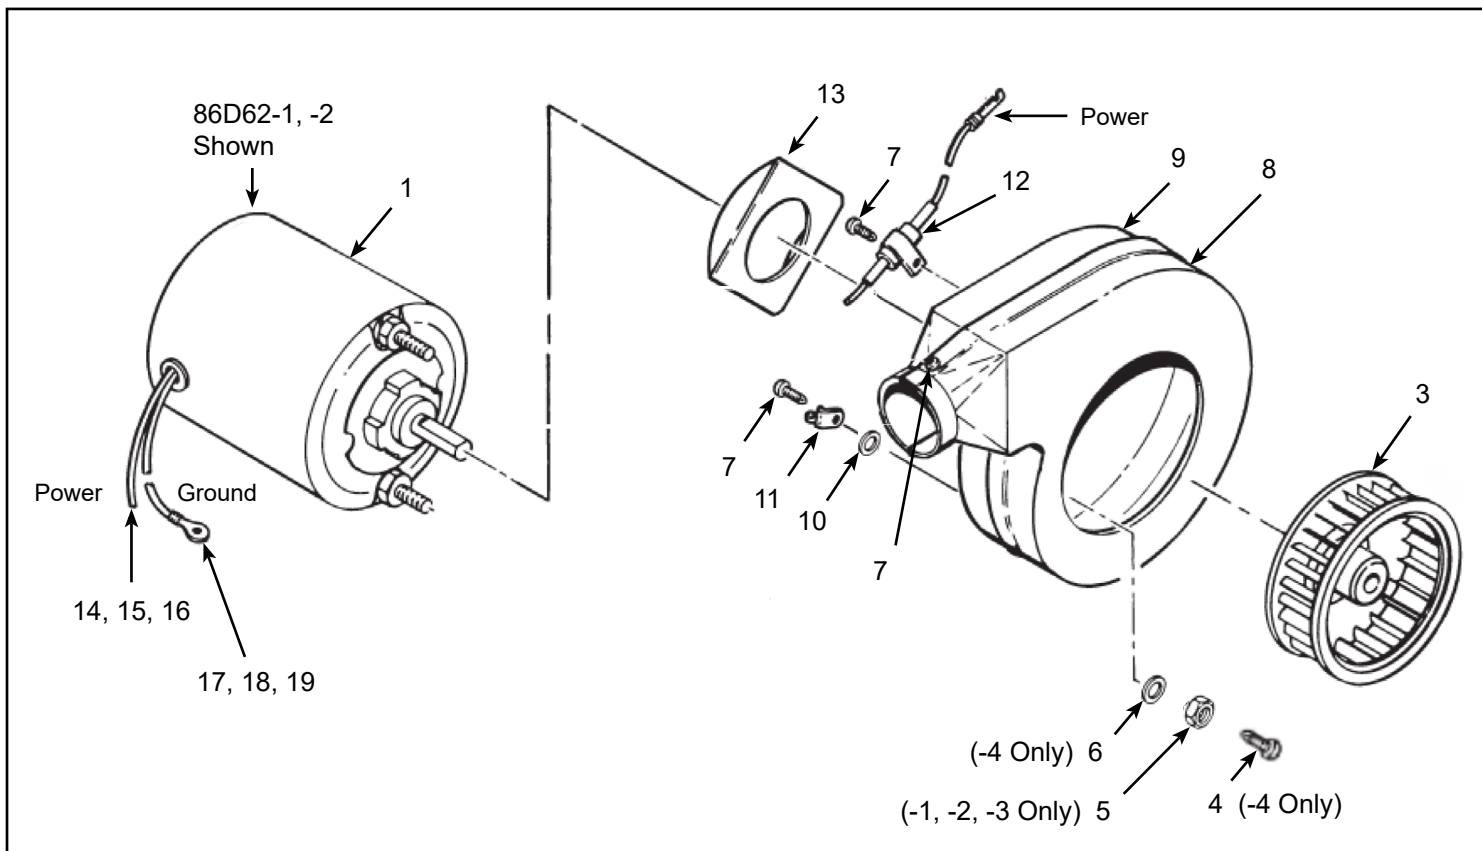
89D22-(), 90D39-() Blower Assembly, Typical
